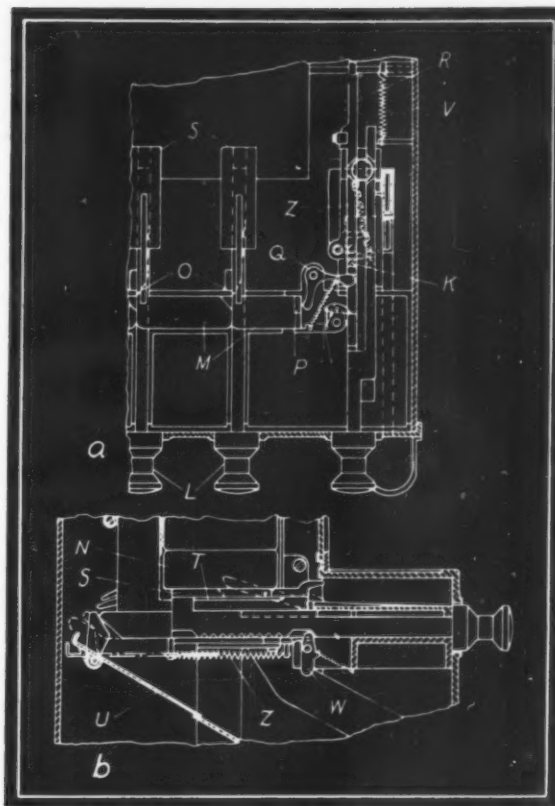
Plunger mechanism incorporating foolproof devices is installed horizontally in base of machine
